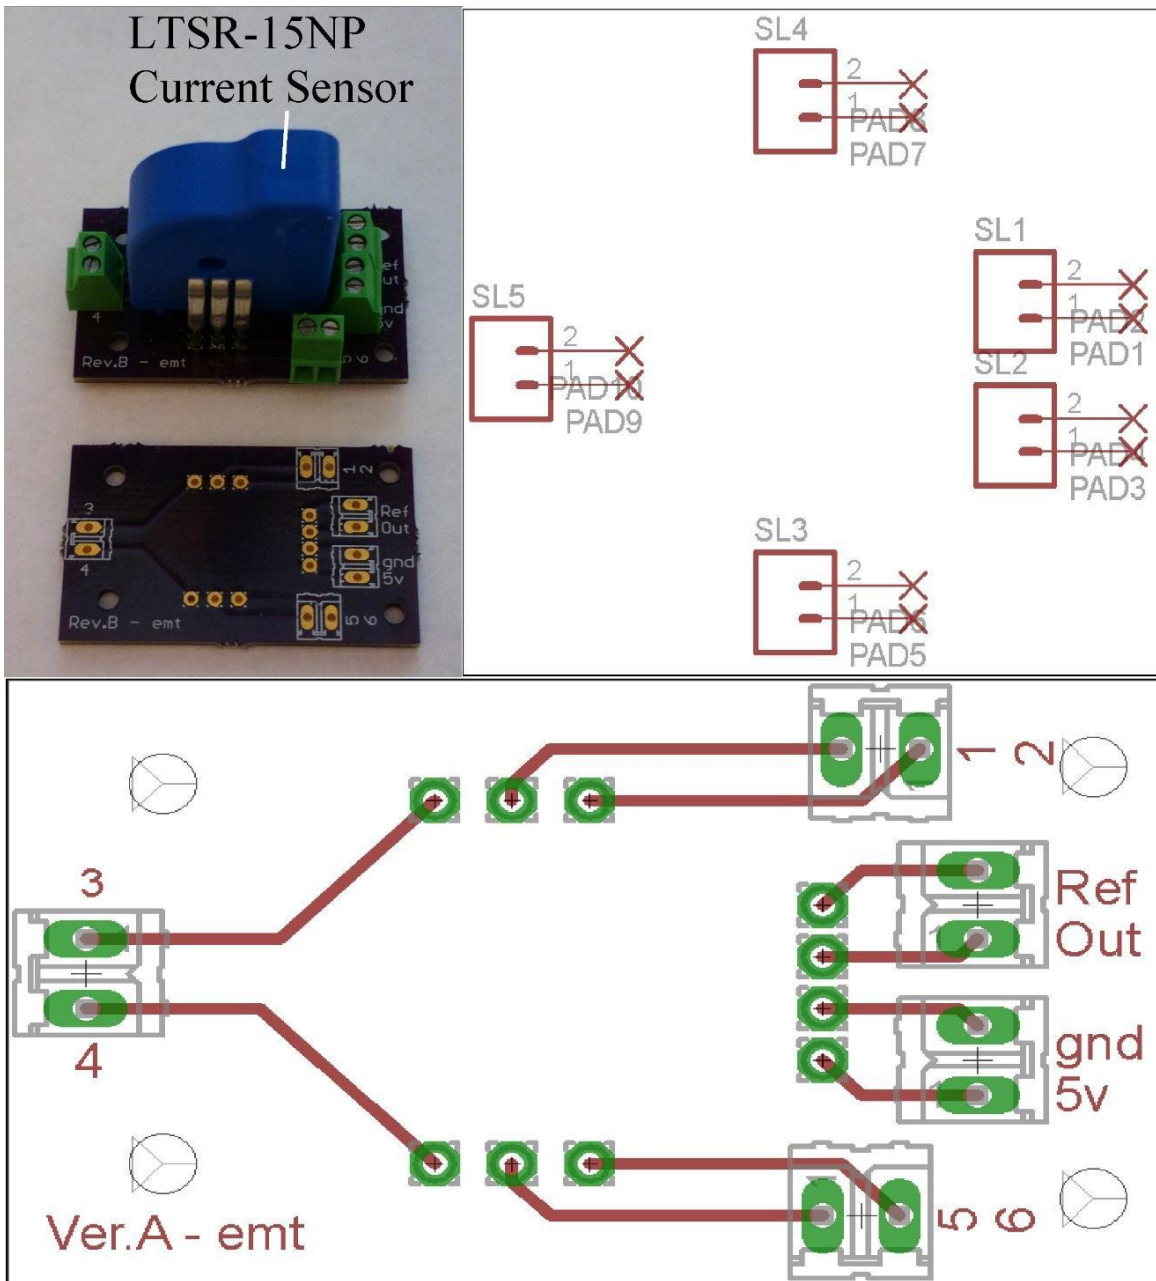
Current sensor board details. Populated board, bare board, board layout, and schematic.
